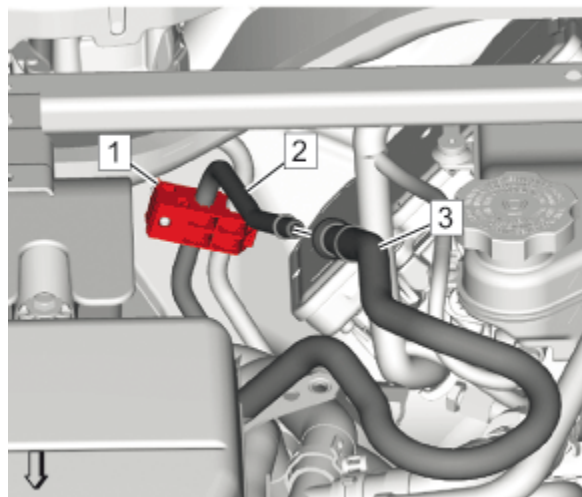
Fuel Feed Front Pipe, Fuel Feed Pipe And Retainer
